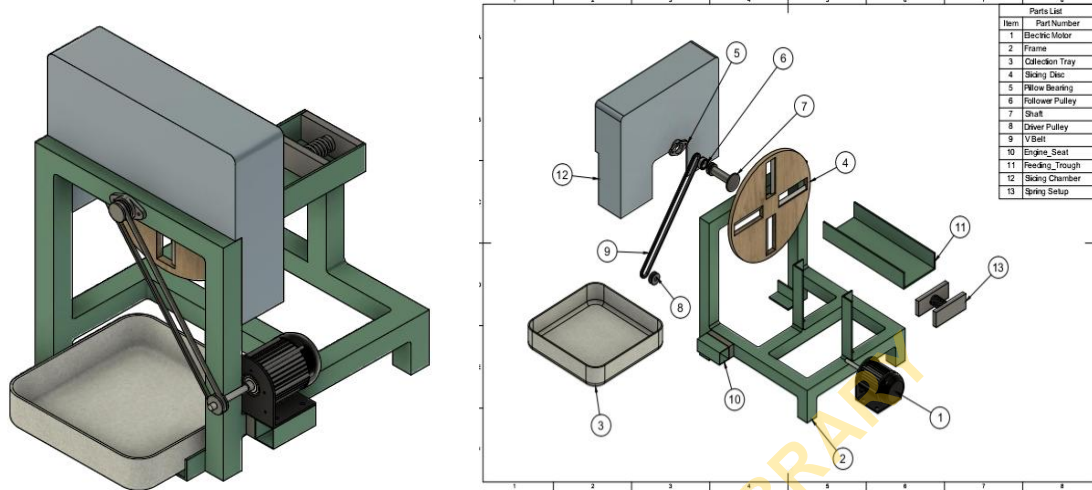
(a) Isometric view of the slicer (b) Exploded view of the slicer
